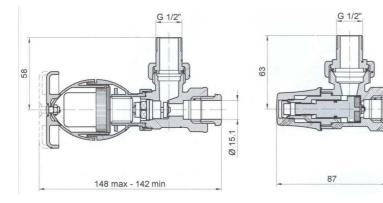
Regulation valve Bohemia with the thermostatic head
